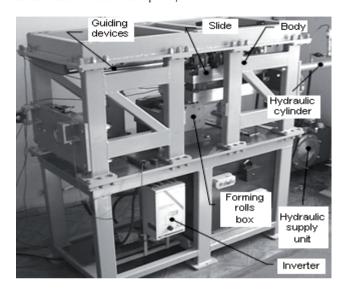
Laboratory rolling mill LUW-2 equipped with forming rolls box for the WRR process
